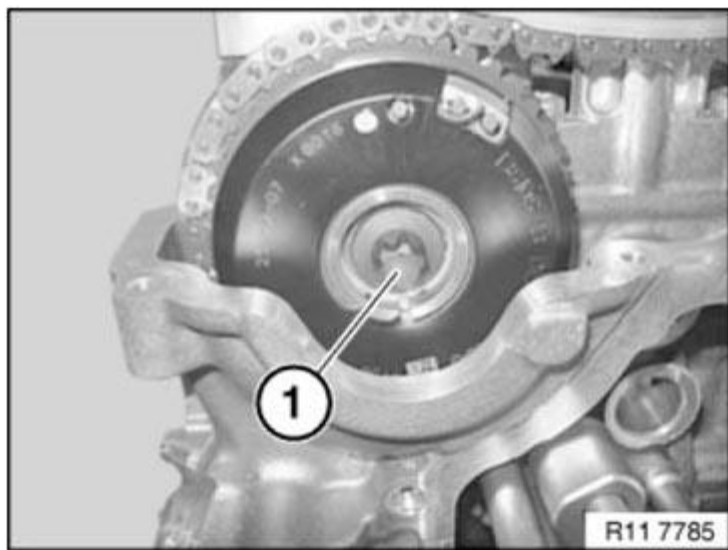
Identifying Central Bolt Of Inlet Adjustment Unit
